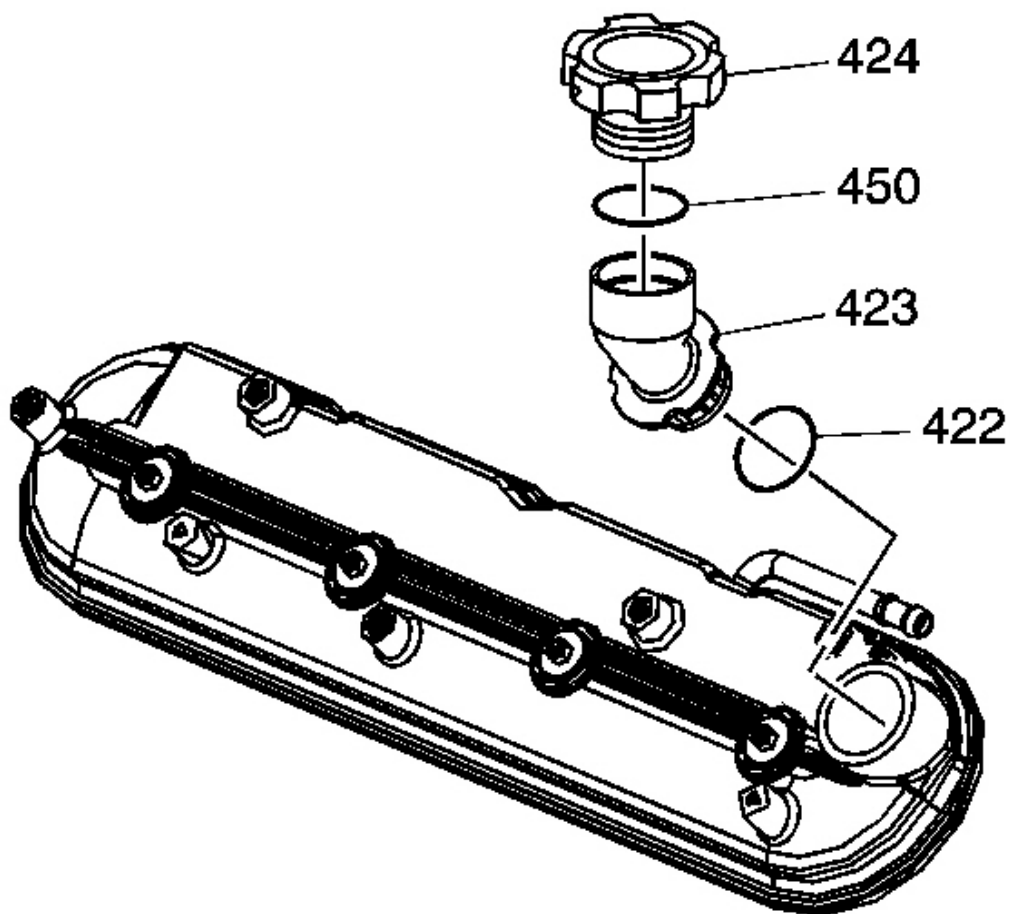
Identifying Oil Fill Cap & Oil Fill Tube
